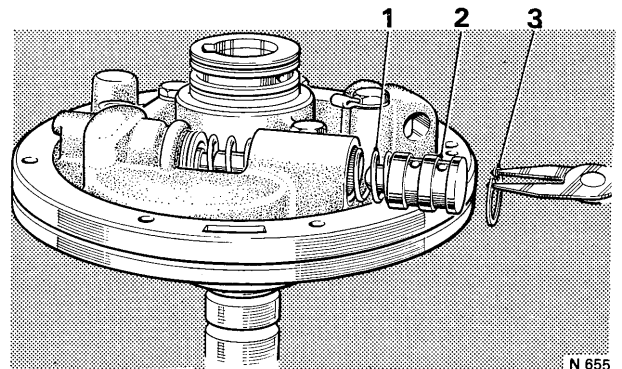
REMOVING THE REGULATOR VALVE RETAINING CIRCLIP
